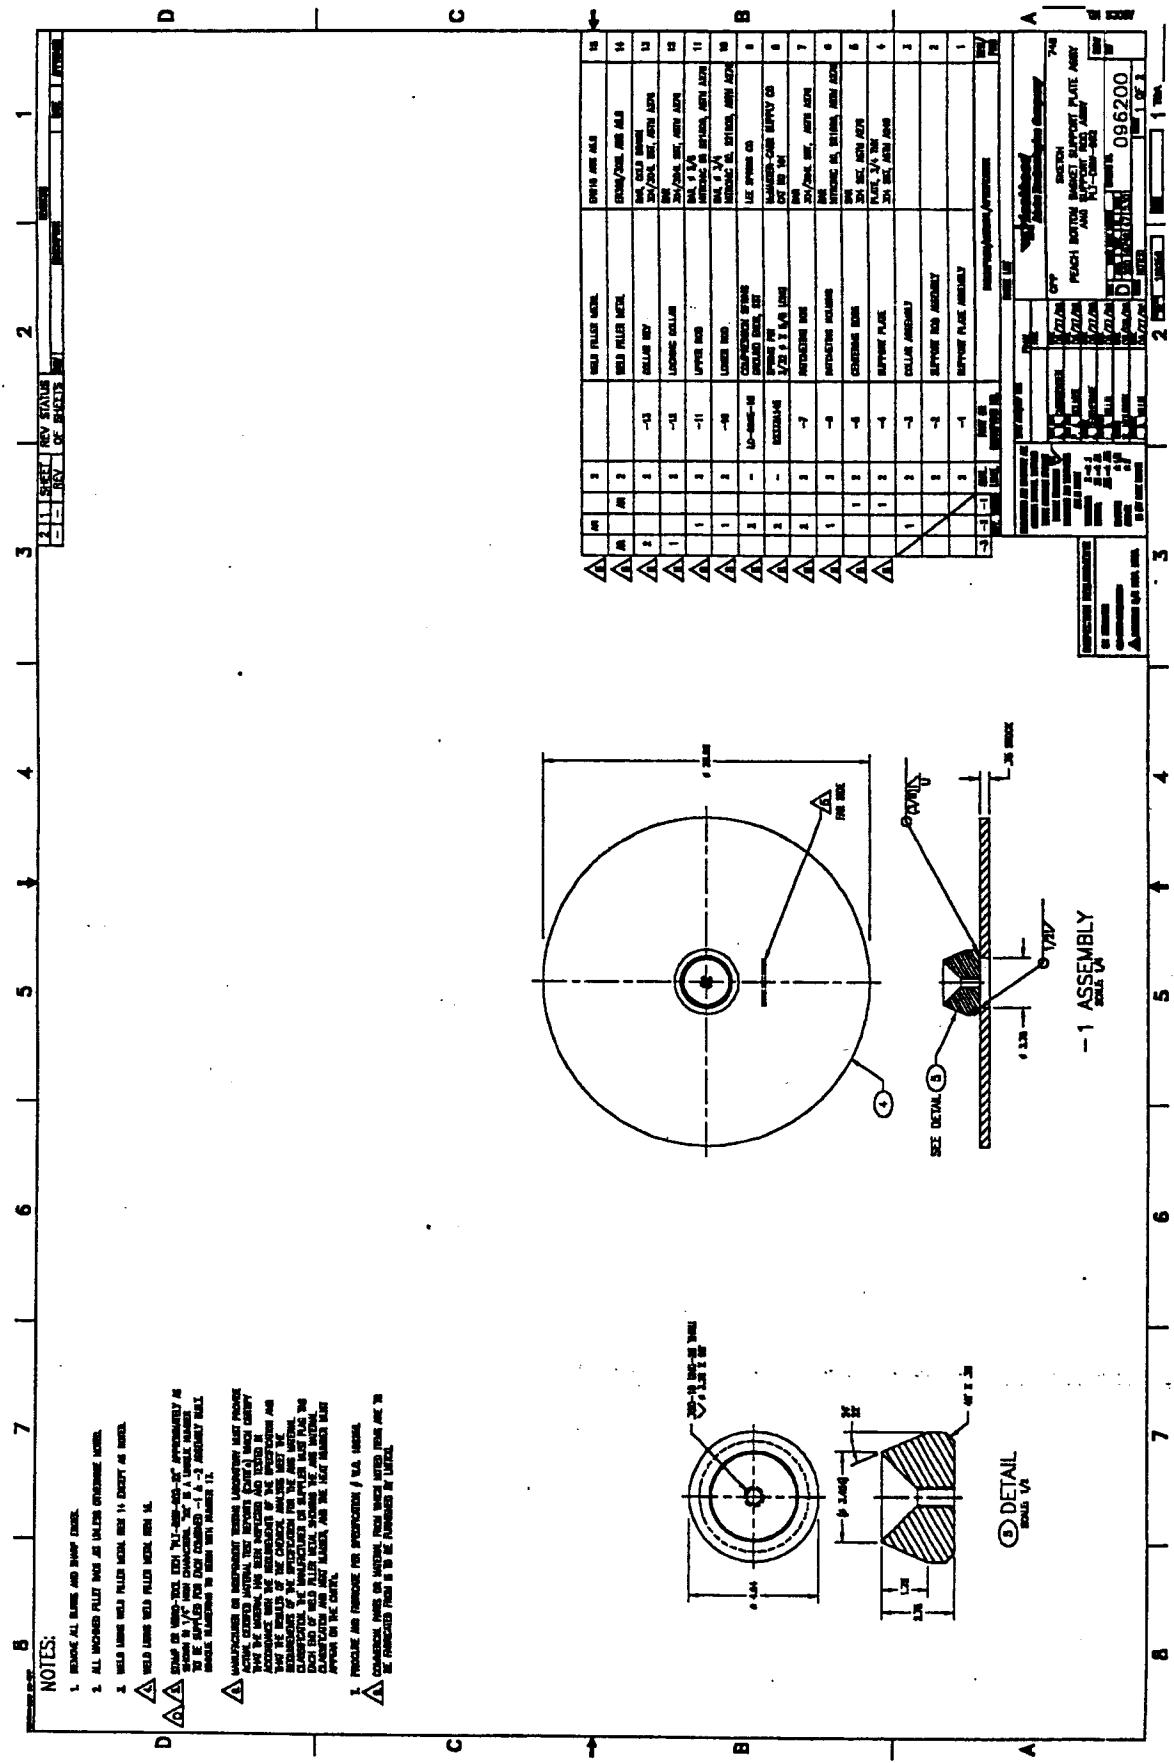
A. CPP-749 Peach Bottom Basket Support Plate Assembly
